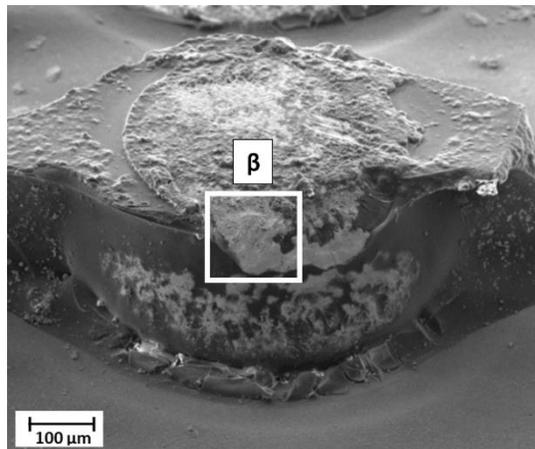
(a-c) show solder joint separation locations at the PCBA side along with their SEM image. The rounded surface indicates a separation from the IMC layer (β), whereas the flat surface indicates a separation near the bulk solder (a). The SEM image shows two different surface topographies: an intergranular surface (β) with dye penetration and an elongated surface (a) fracture with no dye penetration as shown in Figures 11 (d) and (e). The image of the intergranular surface shows no signs of severe plastic deformation, indicating a brittle fracture that generates an unstable crack that quickly propagates, allowing the dye to penetrate. The elongated surface has spherical dimples, which are indicative of a ductile fracture. This is consistent with the findings of the Nourani and Spelt (2015) investigation, the brittle fracture surface was flatter and smoother, resulting in a progressive change in the crack route from the bulk solder to the brittle IMC.
